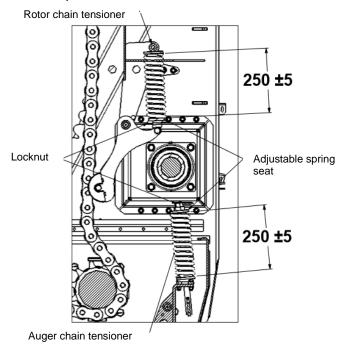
MechFiber380 rotor and auger chain tensioners — 1000 RPM
